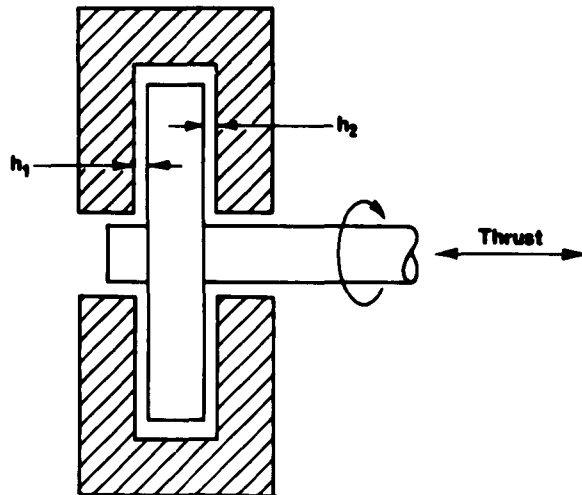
Schematic Diagram of Double Acting Thrust Bearing.
